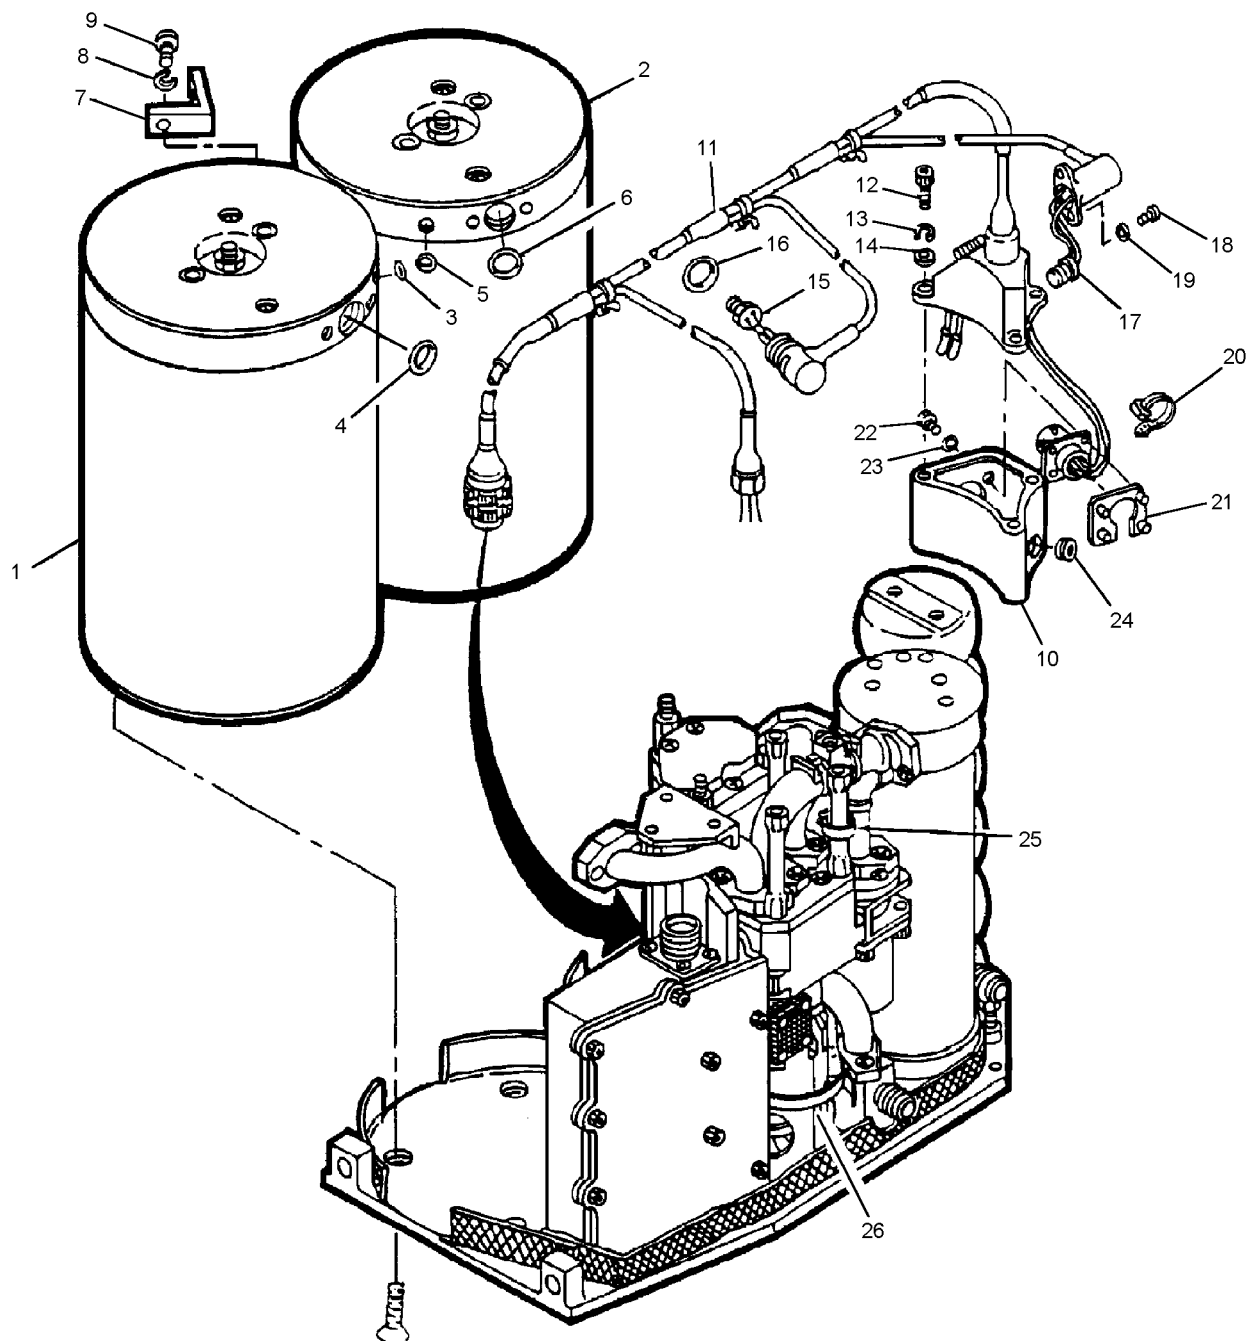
Molecular Sieve Bed Assemblies/Special Cable Assembly/Electrical Box
